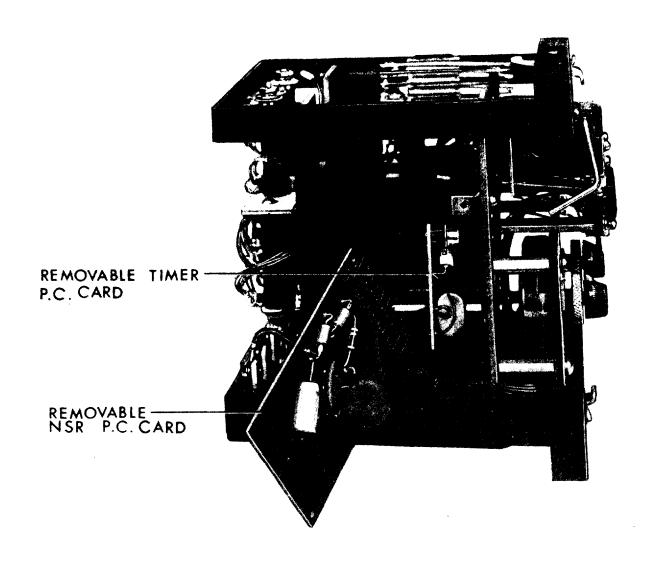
(8042601). Side View of the NSR21H Relay Highlighting the Removable Printed Circuit Cards
